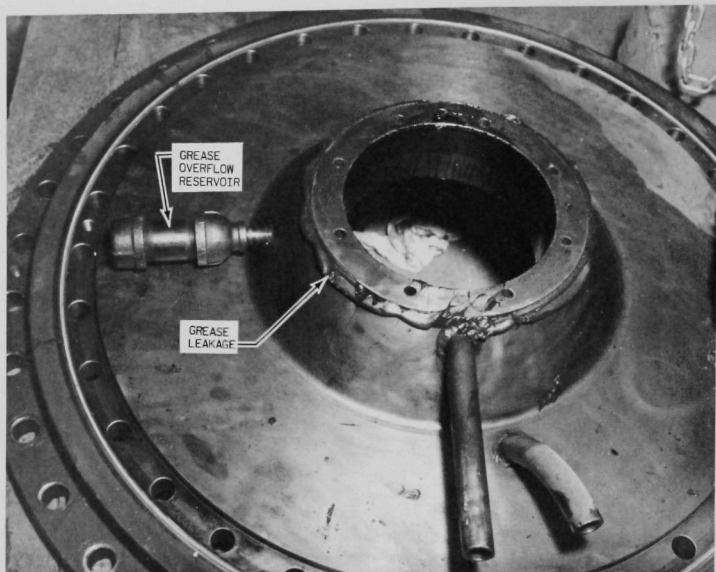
Seal for Lower Bearing of Drive Motor. ANL Neg. No. 103-O5063A.
